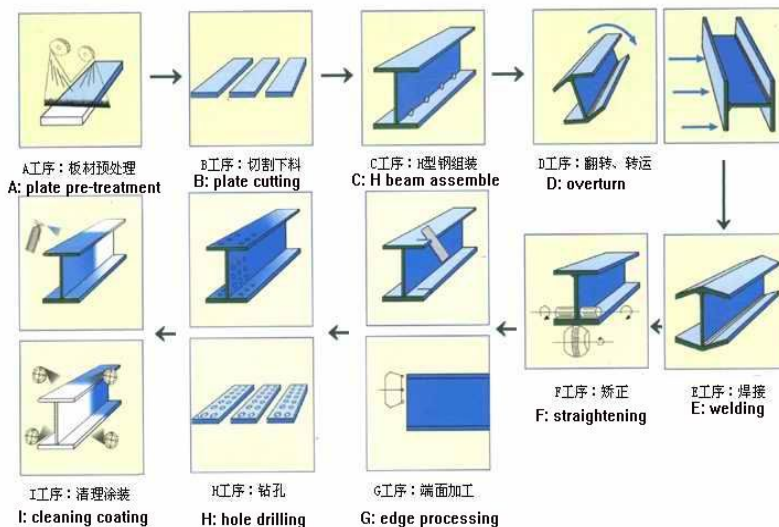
Fillet welding process in manufacturing steel structure
